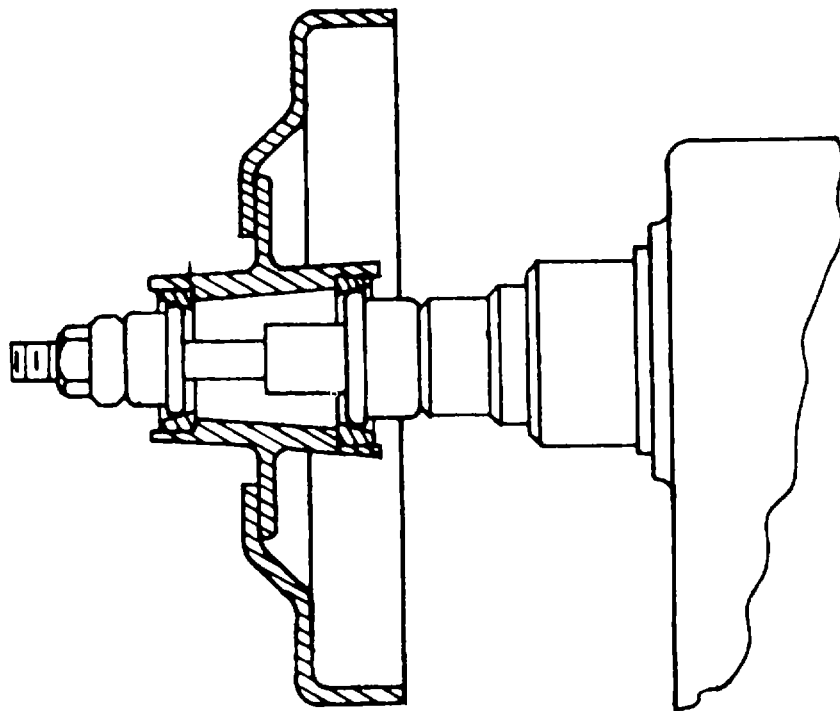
TAPERED BEARING EQUIPPED HUB
